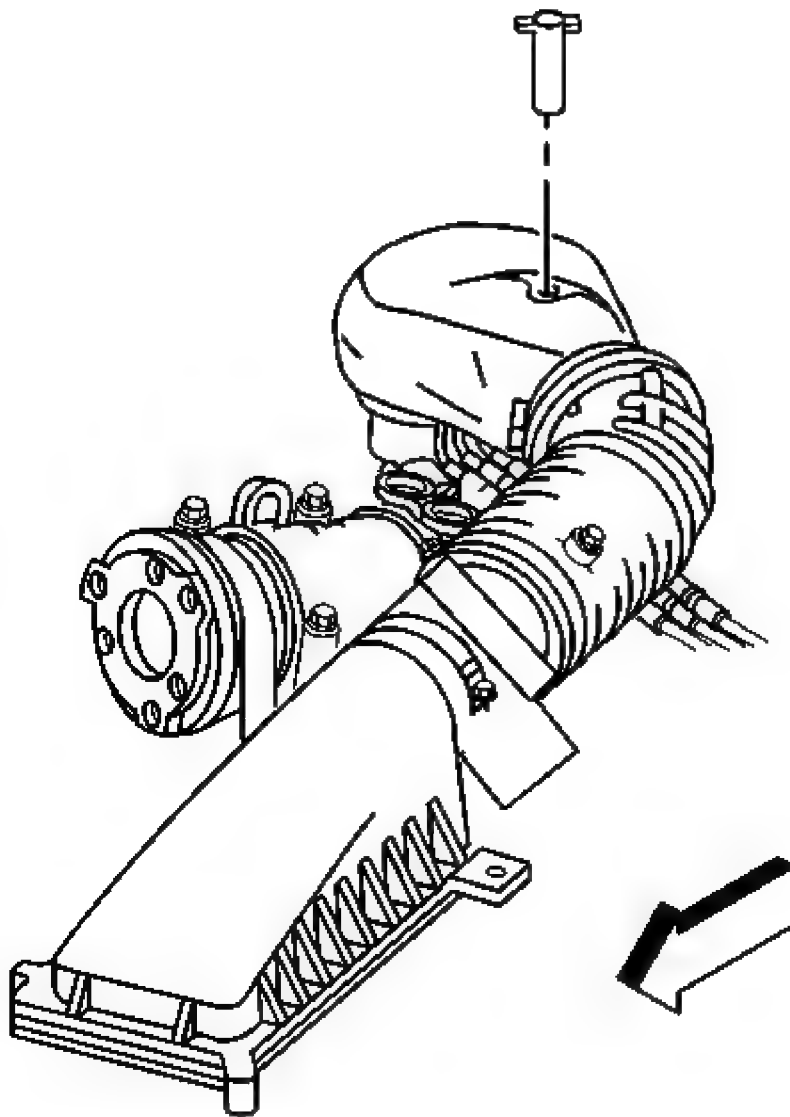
Locating Cleaner Outlet Duct Retaining Wingnut
